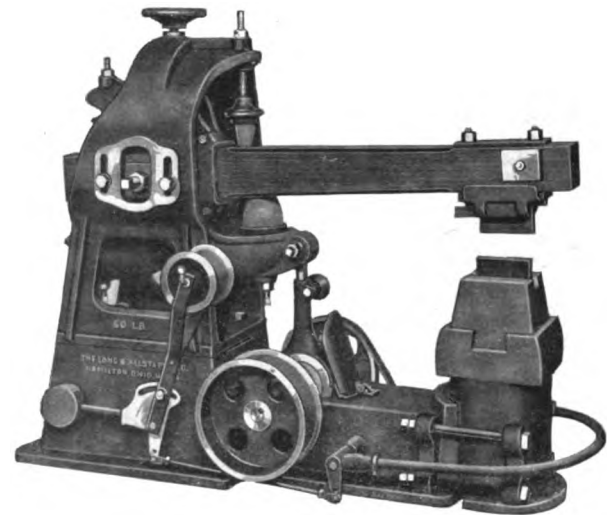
60-lb. Rubber Cushion Helve Hammer
